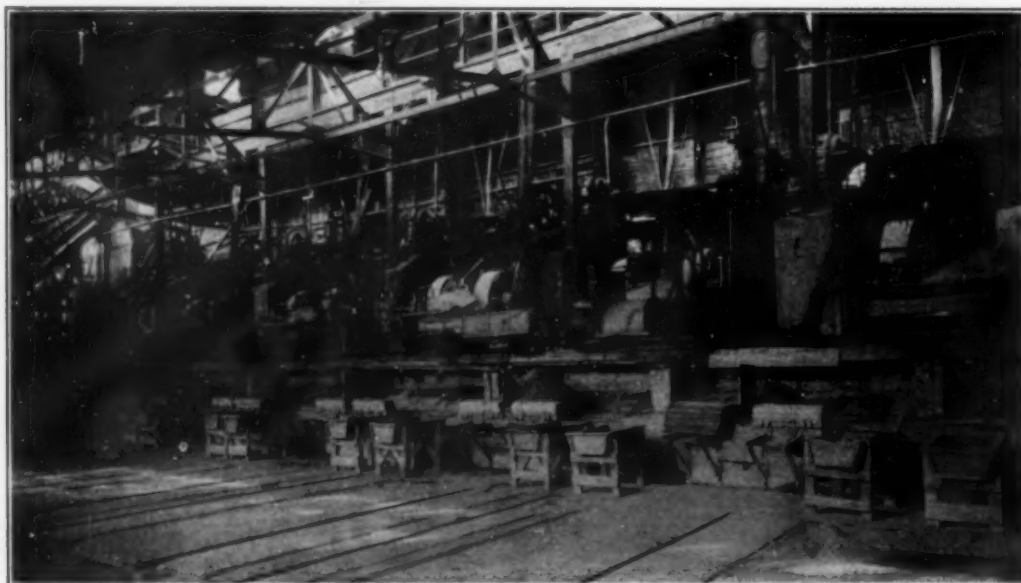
Grinding and Molding Room in a Silica Brick Plant
